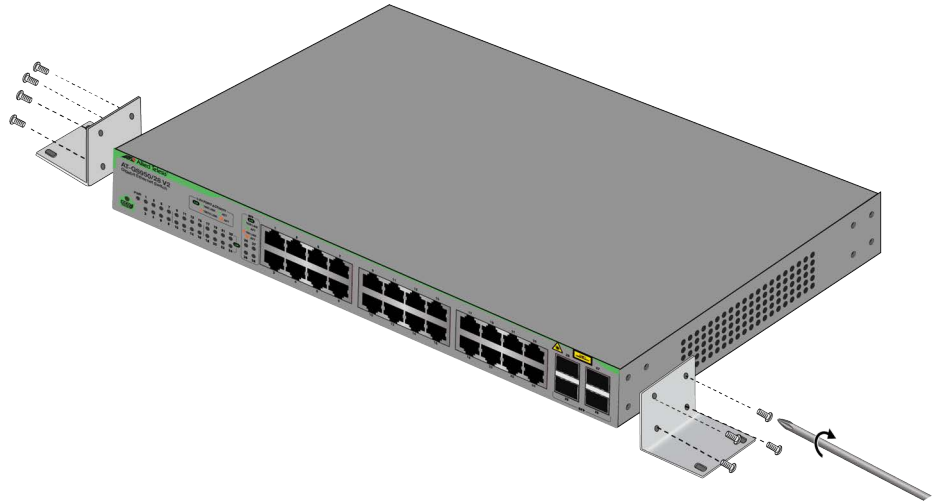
Attaching the Brackets to the Switch for Wall Installation
